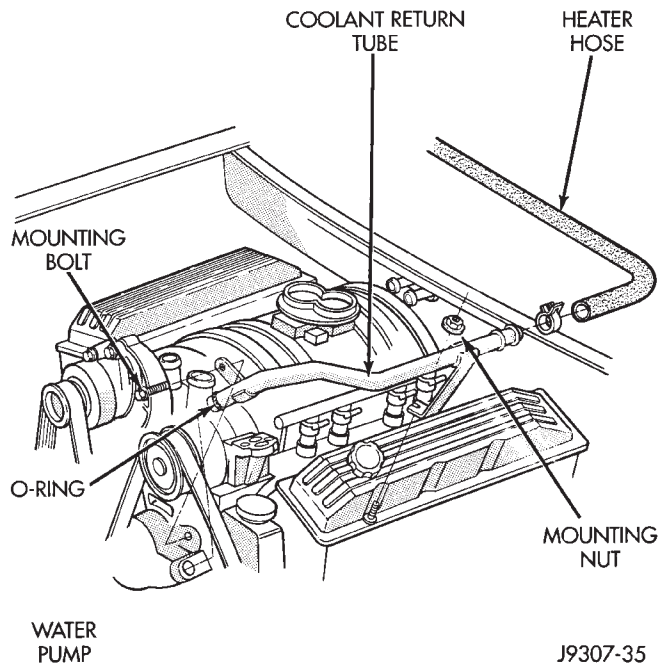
Coolant Return Tube—5.2/5.9L Engines
